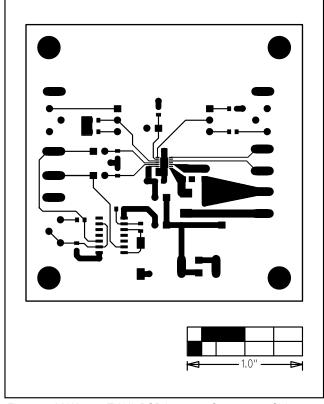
MAX4990 EV Kit PCB Layout—Component Side
